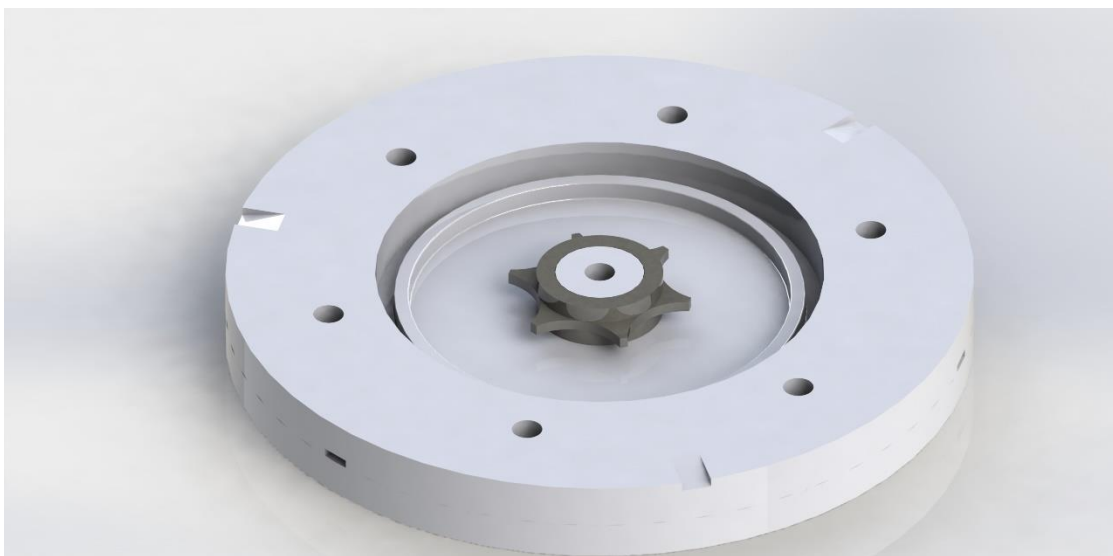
Rotor Bushing Mounted On Rotor Cast Form.
